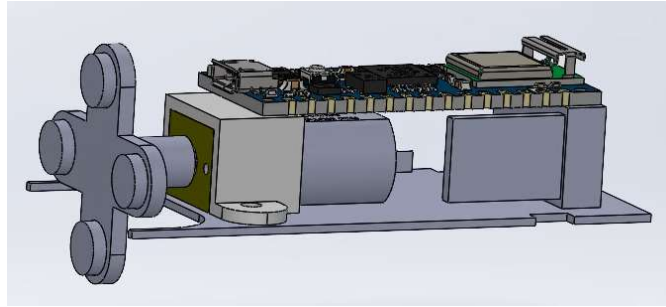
Magnet attachment on pin of motor, slider piece also pictured
